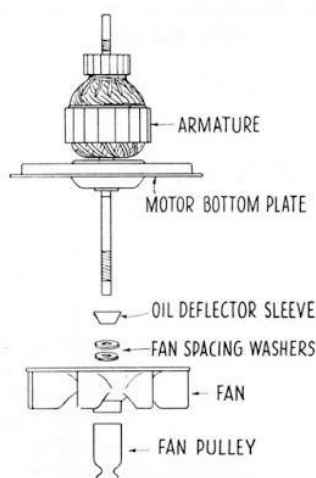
Fan assembly on motors having lower porous bronze bearings
